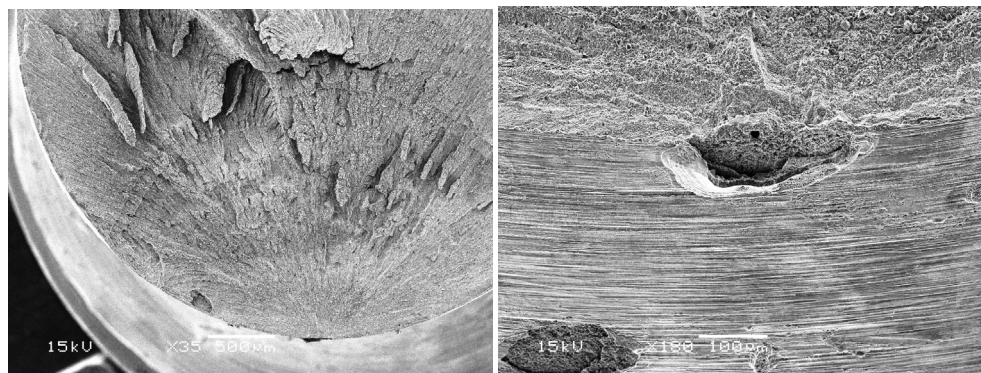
Fracture surface of the test specimen tested in water environment at 260°C (initial O₂ = 4,5 ppm, R.A. = 12,4%)
